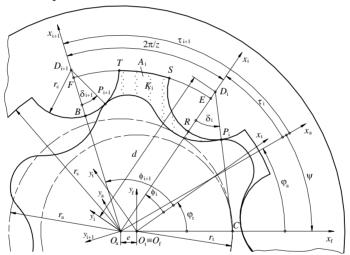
Schematic presentation of the gerotor pump gear pair with basic geometrical dimensions
